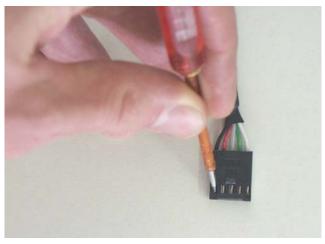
Removing contacts of the black molex connector on the valve-to-control module cable.
